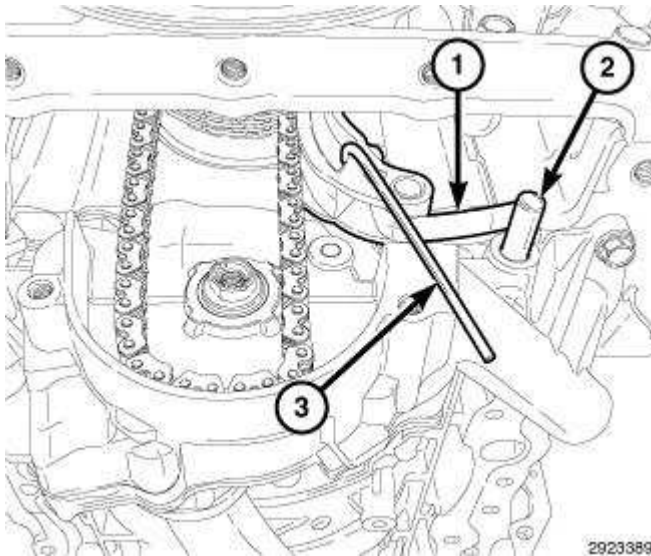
Retaining Pin, Oil Pump Chain Tensioner Spring & Dowel Pin
